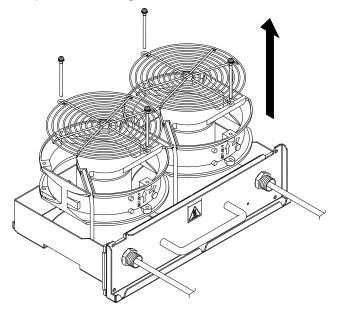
Cooling Fan Disassembly: 2A0143 to 2A0273, 4A0156 to 4A0240
